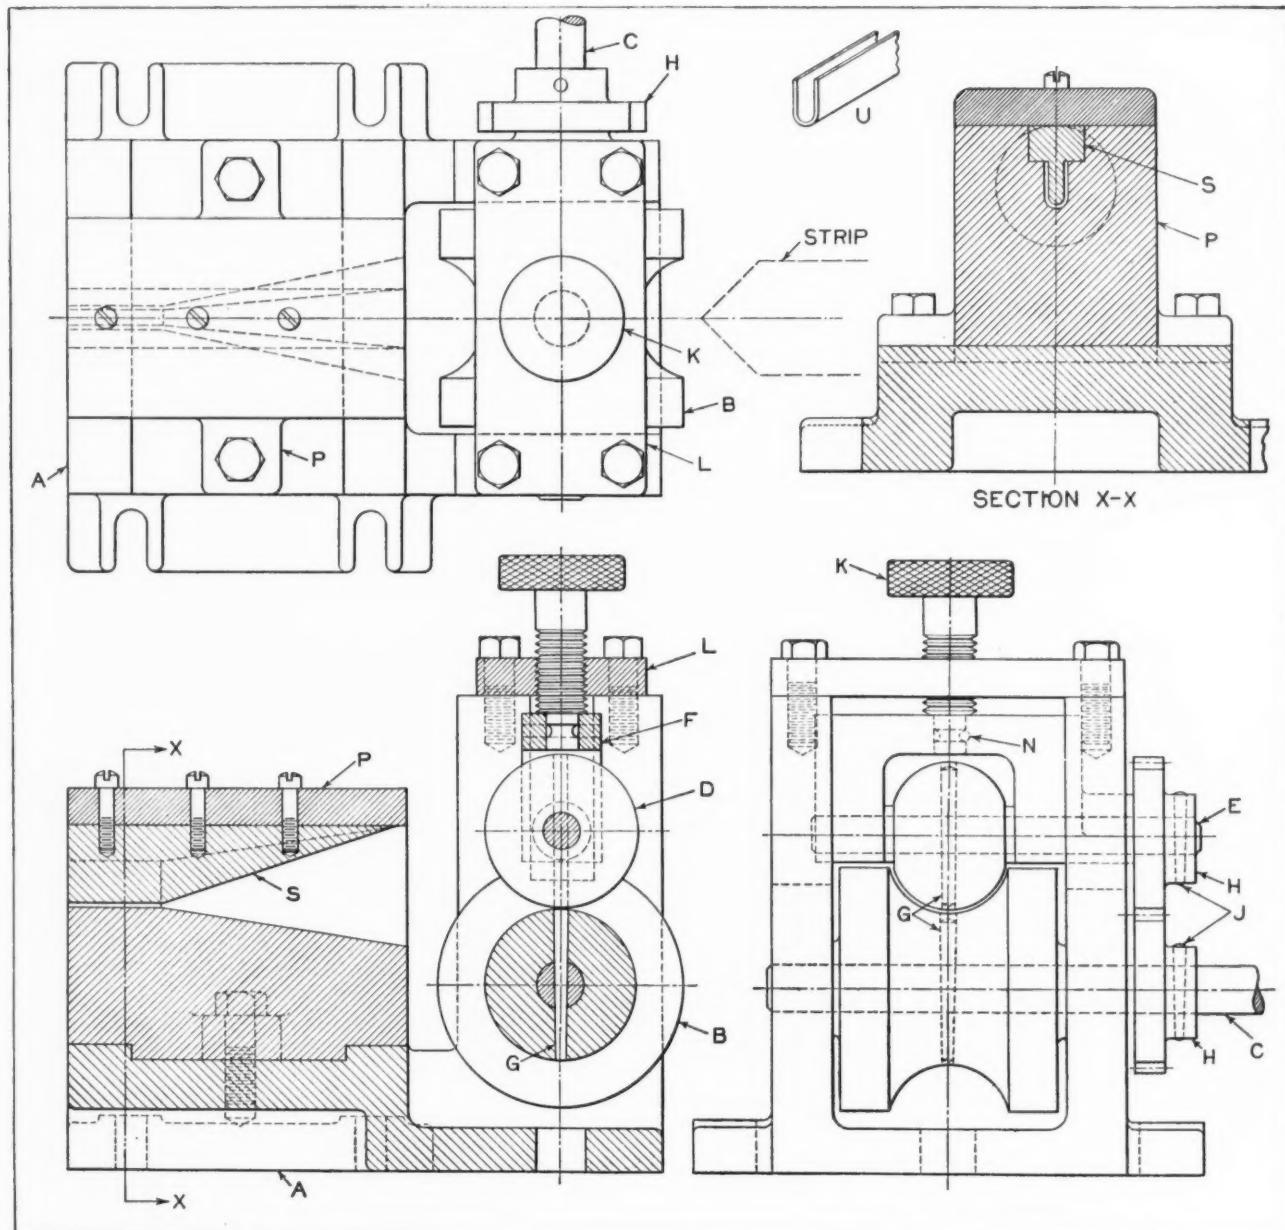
Forming Mill for Producing U-shaped Sections from Flat Strip Stock
